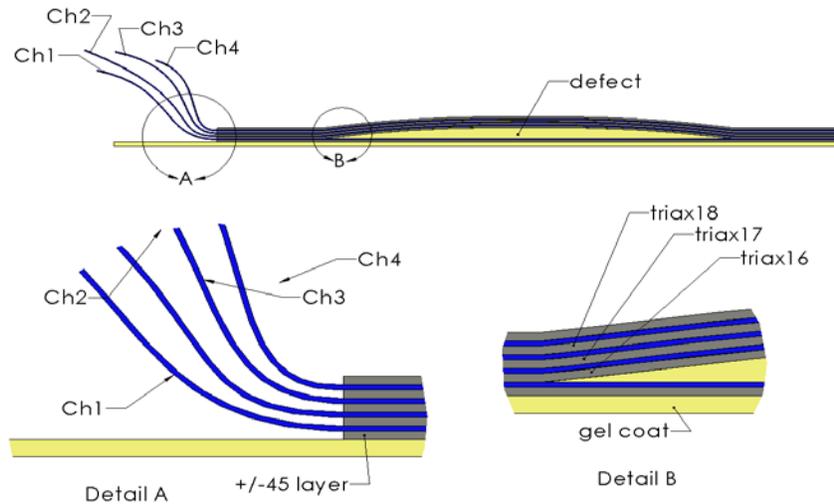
Sectional view of defect with optical fibers embedded between four layers of the spar cap [2].
